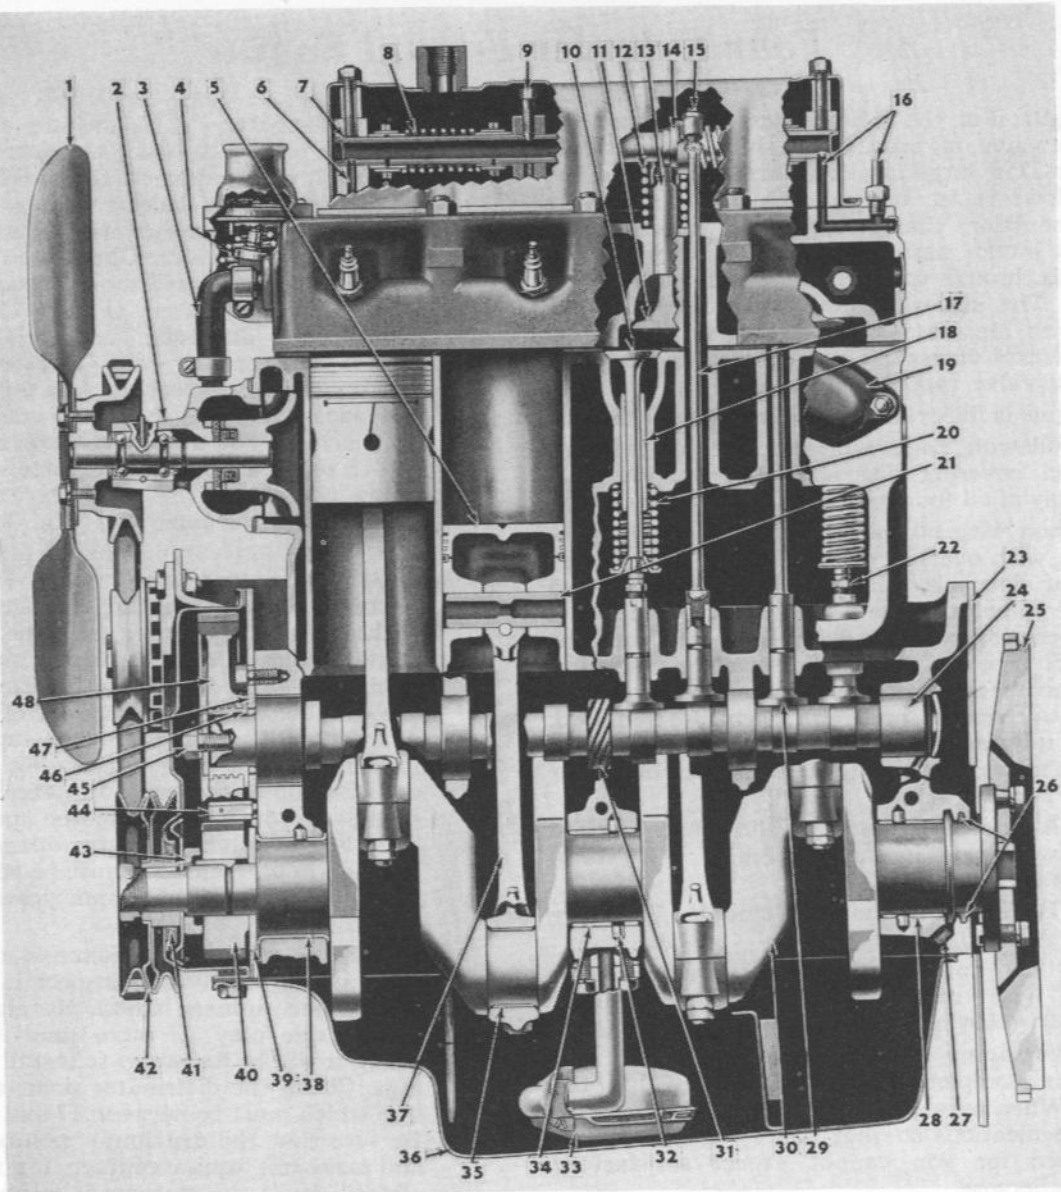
FOUR CYLINDER F-HEAD ENGINE—SIDE VIEW
